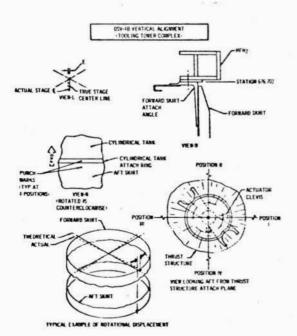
Verifying Displacement of Assembled Components Figure 2 illustrates the floor reference targets which form the basic datum points for the position axis. A jig transit is adjusted to establish a line on the floor reference target. The assembly jig can be rotated to allow the position points of the jig to coincide with the line of sight of the jig transit. The jig transit is arced to observe attach-angle punch mark. Adjusting the optical micrometer attached to the transit objective lens permits displacement observations to be measured and recorde.
